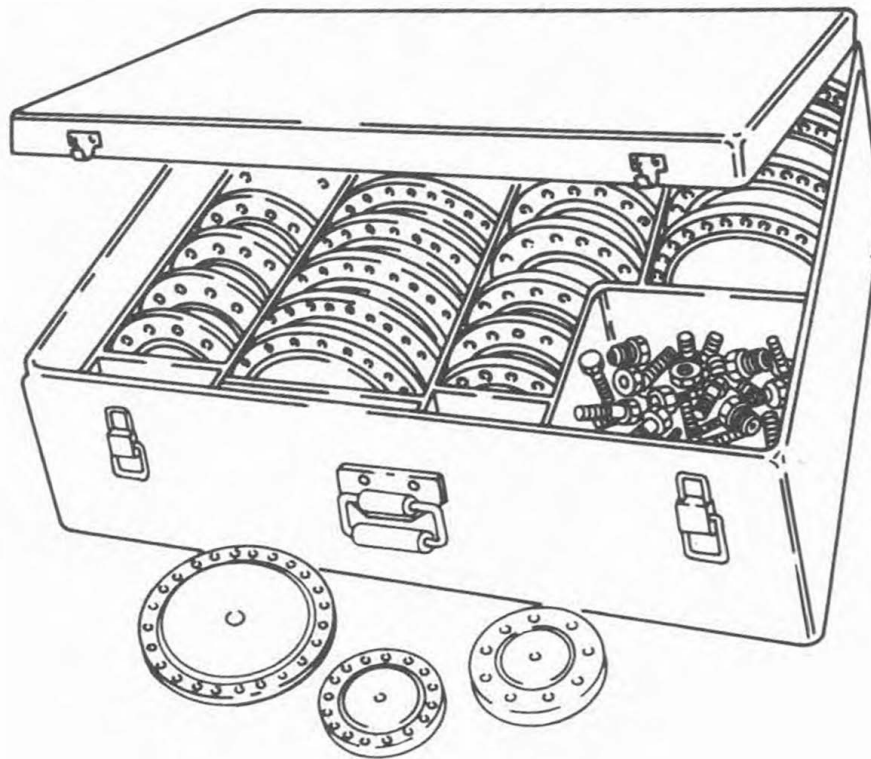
Pneumatic Checkout Blanking Plate Set (C7-53)
